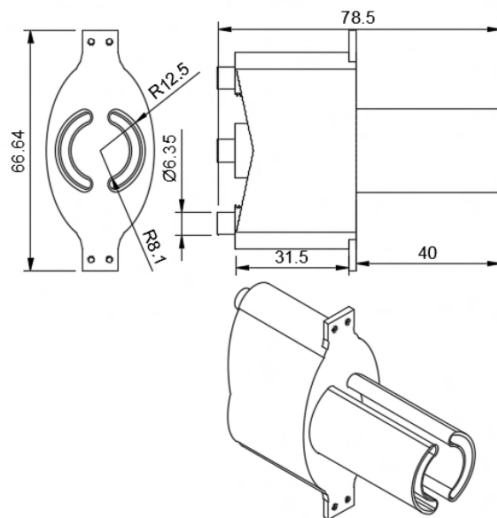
Mark 3 PSDS - key dimensions in mm.
